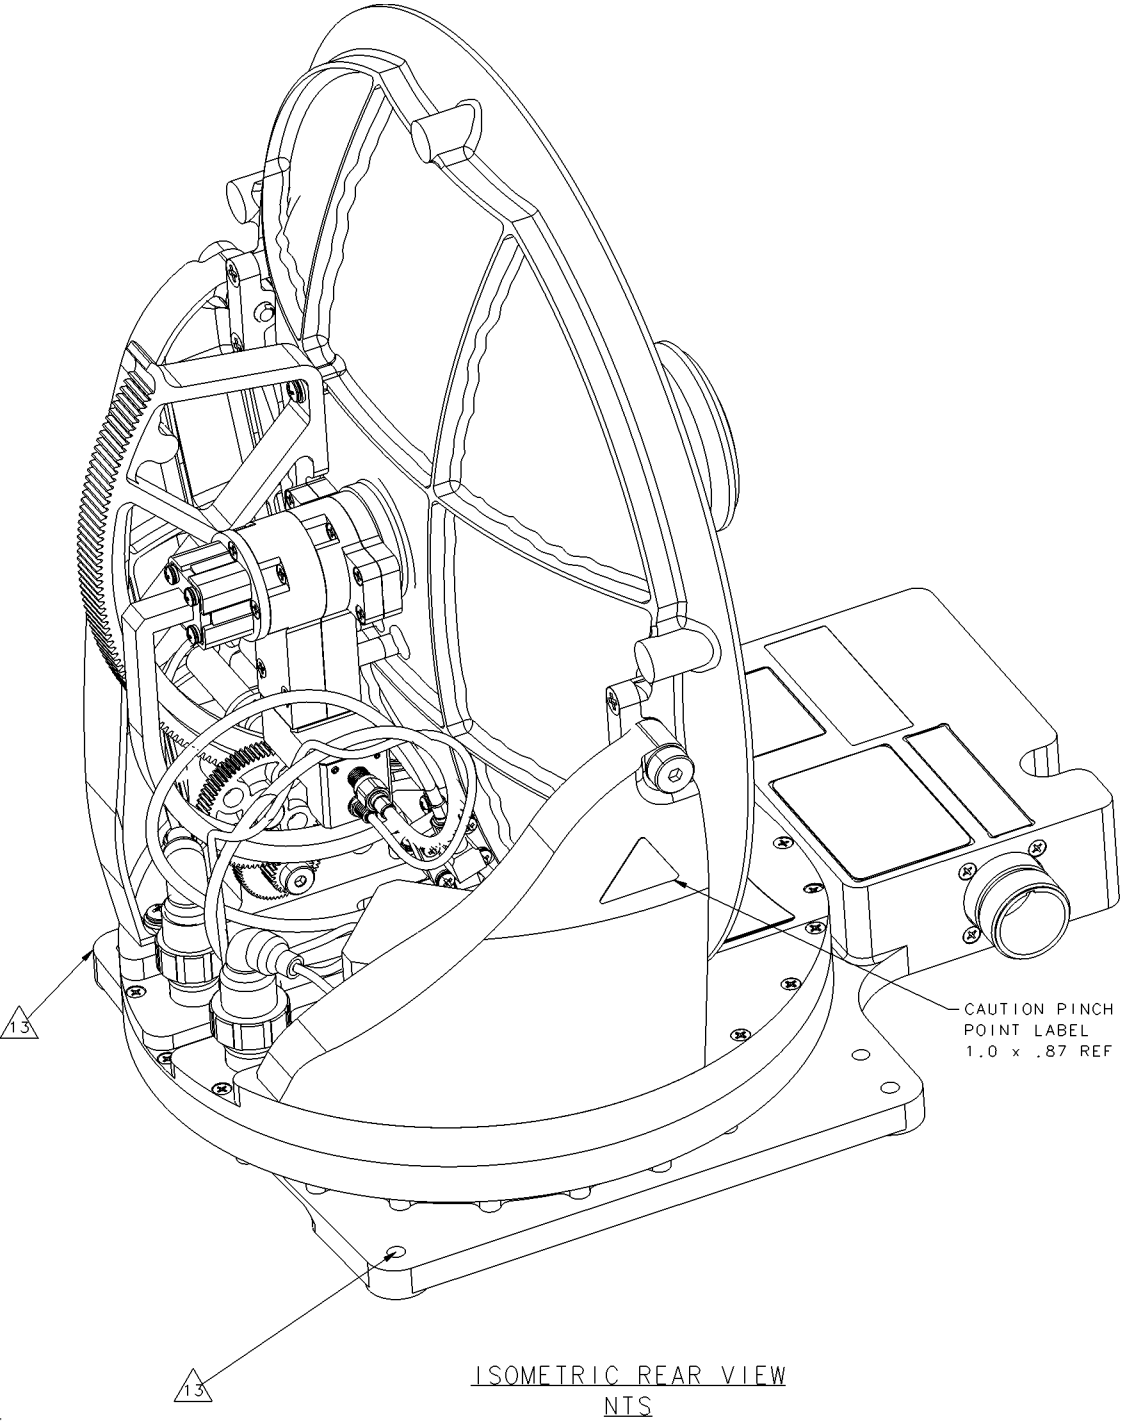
(Sheet 2 of 4) TMA Outline and Installation Drawing (90401428, REV F)
